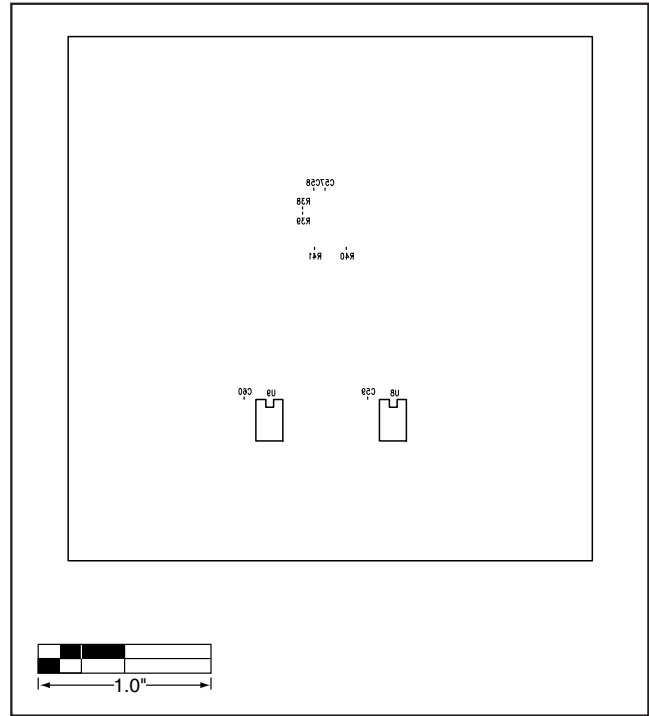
MAX2828/MAX2829 EV Kit PC Board Layout—Bottom Silkscreen
